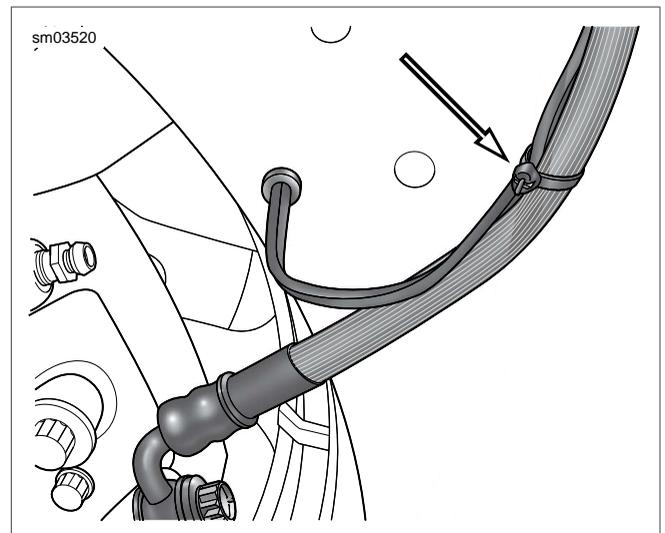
Capture Brake Hose and Front Fender Tip Lamp Wires
